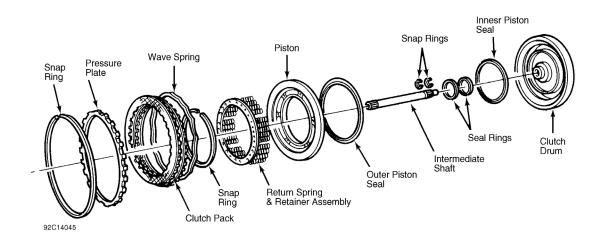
Exploded View of Intermediate Clutch Assembly Courtesy of FORD MOTOR CO.
